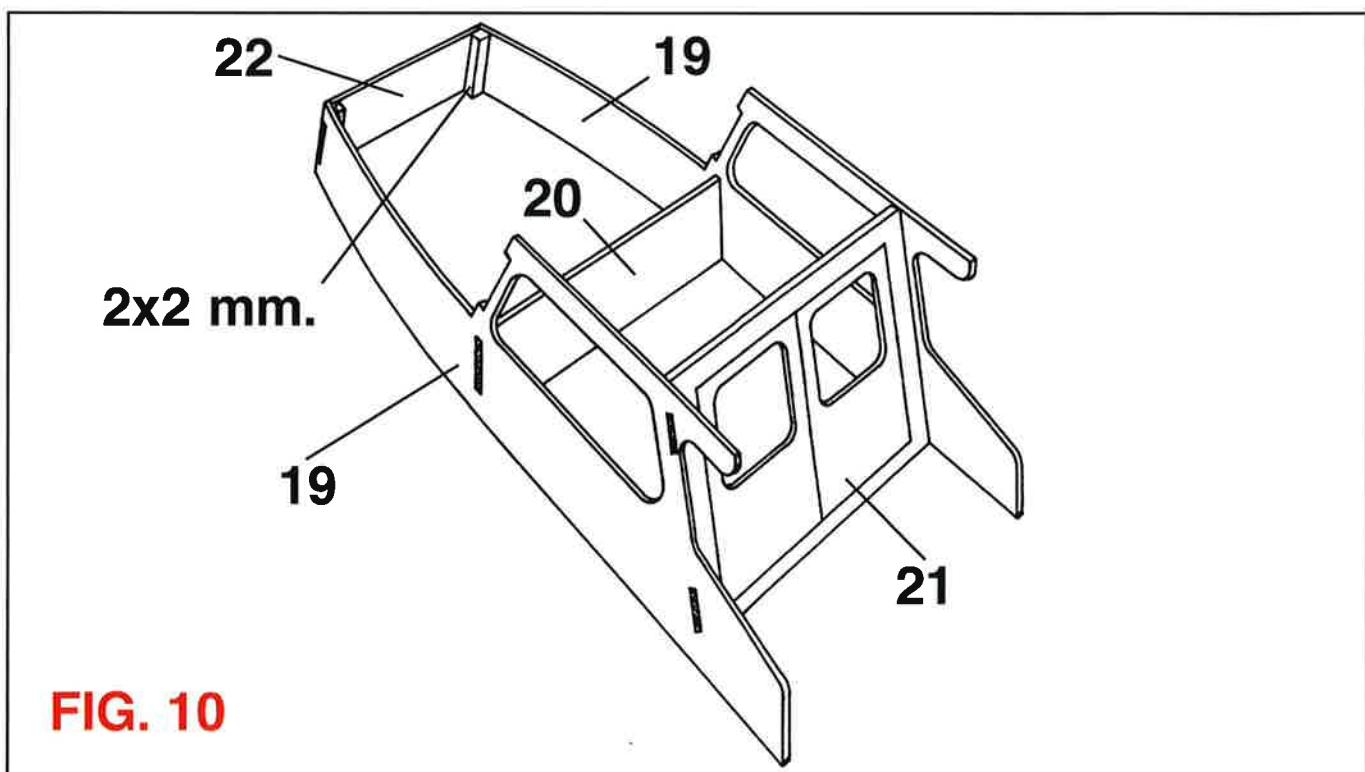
Cabin assembly. First step: assemble the sides N. 19 with the transoms N. 20-21-22. Reinforce the inside corners with some pieces of 2x2 mm strip.
